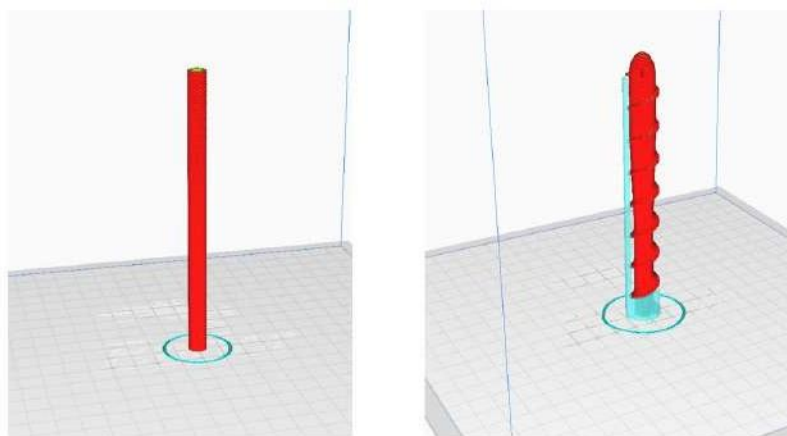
Endless screw print test preview on CURA Ultimaker. Source: own
